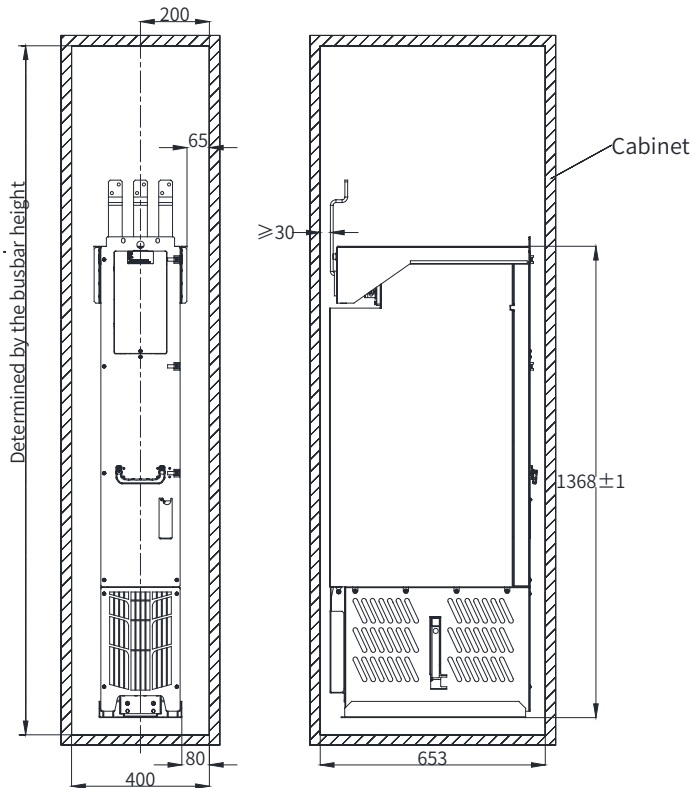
Requirements for the cabinet dimensions (unit: mm)
